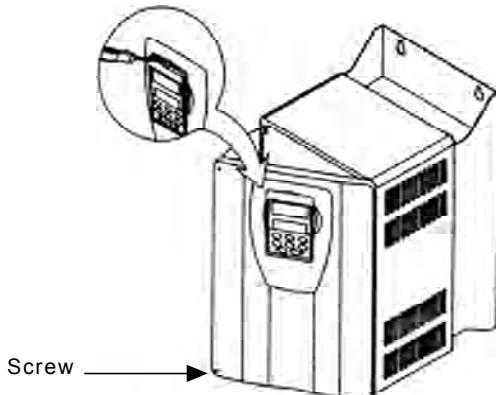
a) and b) – Keypad (HMI) and cover removal procedure
